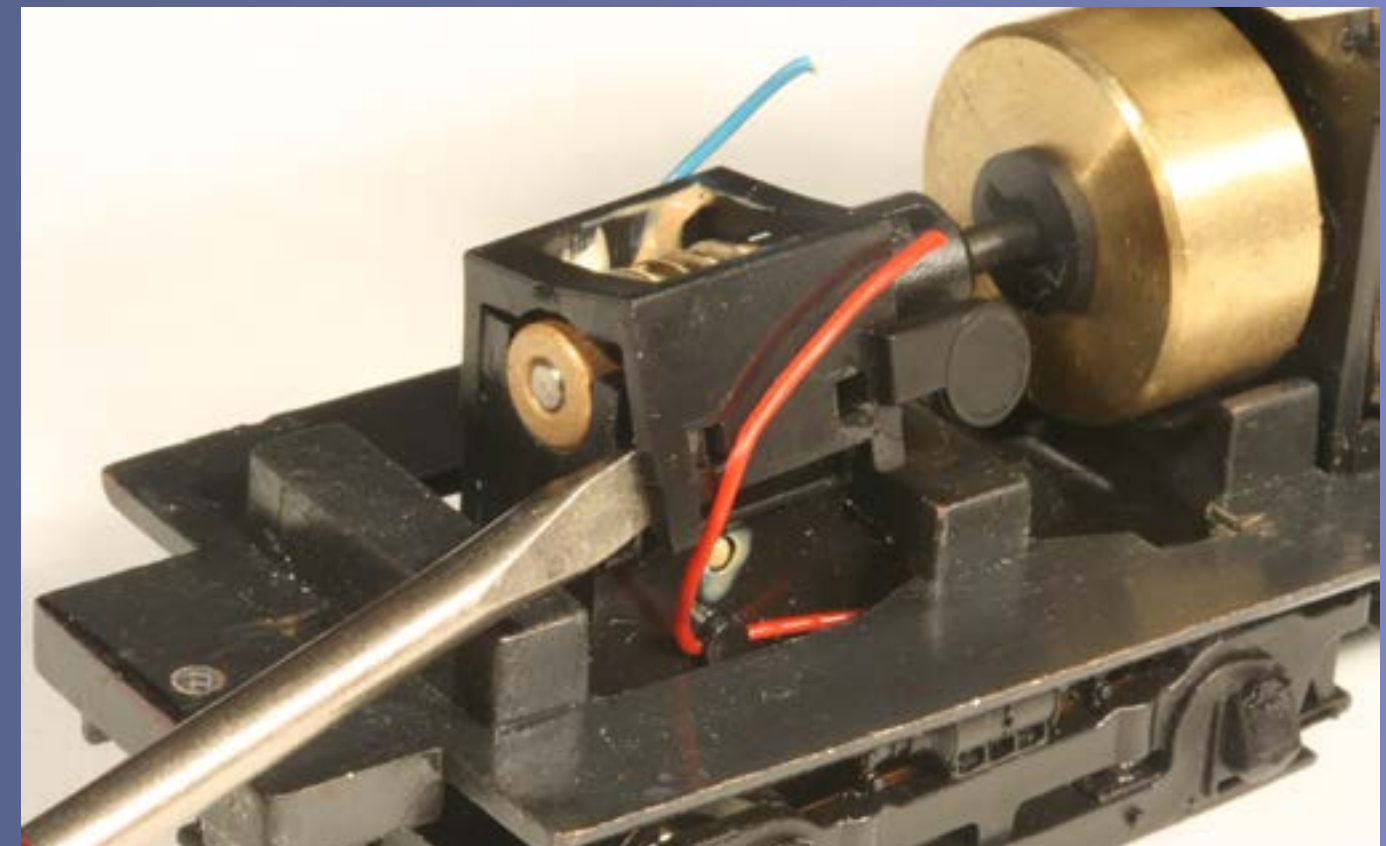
Making a model free rolling involves several steps. The first step is to remove the retainer clip on top of the truck.
